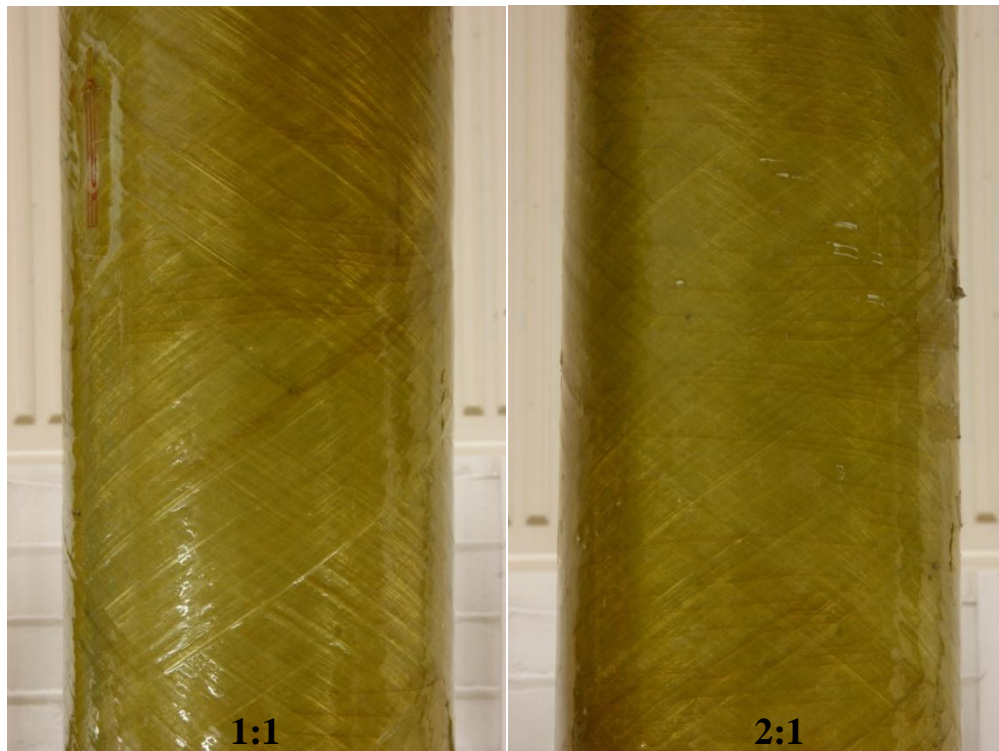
Post inspection of the pipes after UEWS test under 1:1 and 2:1 loadings. Visible white striations clearly observed on the surface of the pipes indicating matrix crack damage.
